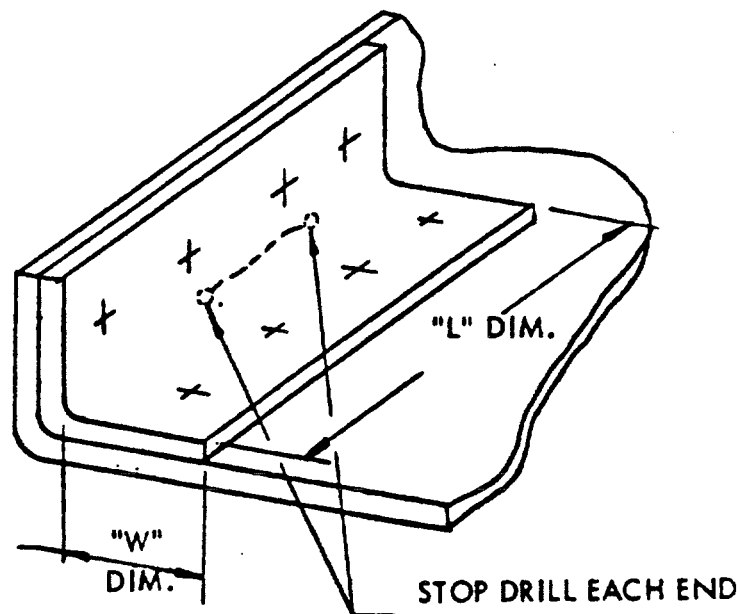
LENGTH-WISE CRACKS IN FLANGES
